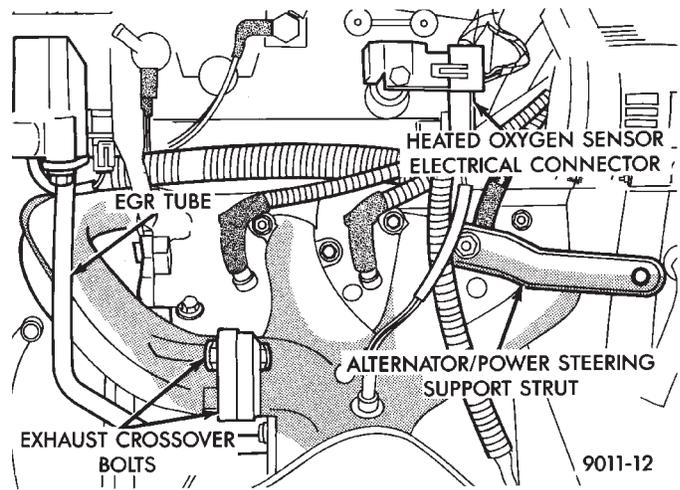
EGR Tube, Heated Oxygen Sensor and Alternator/Power Steering Strut
